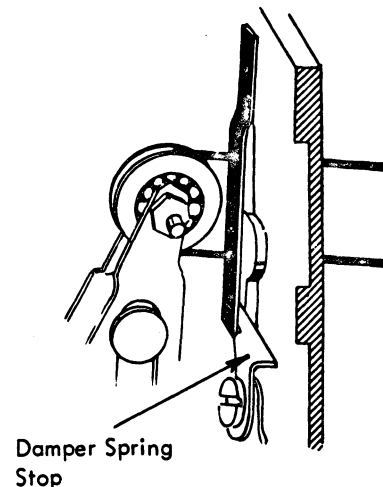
Damper, Spring Stop - Preliminary Adjustment
